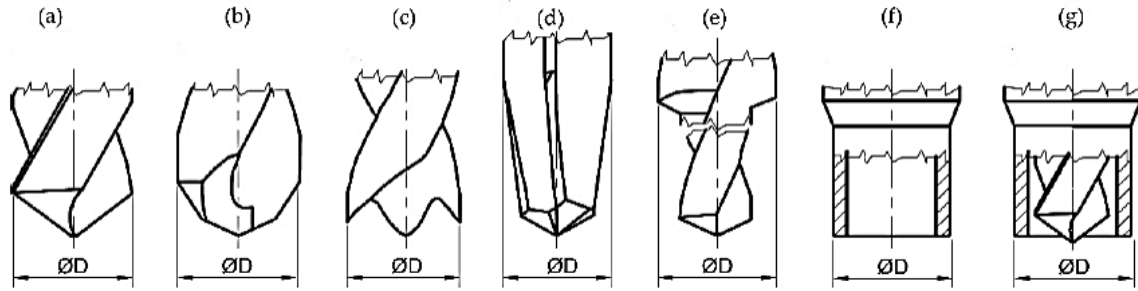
Drilling tools geometries: (a) conventional twist drill; (b) double point angle twist drill; (c) brad and spur drill; (d) dagger drill; (e) step drill; (f) core drill and (g) special core drill [26].
